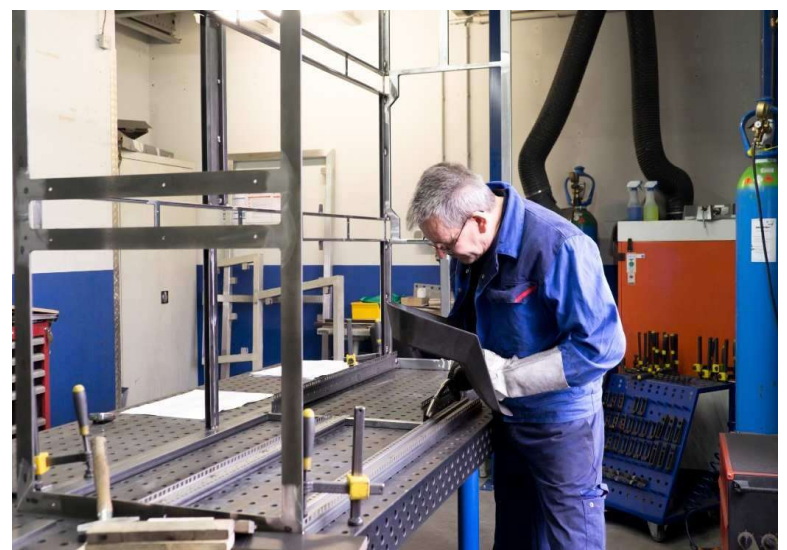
Rack welding accurate to the millimetre in-house
